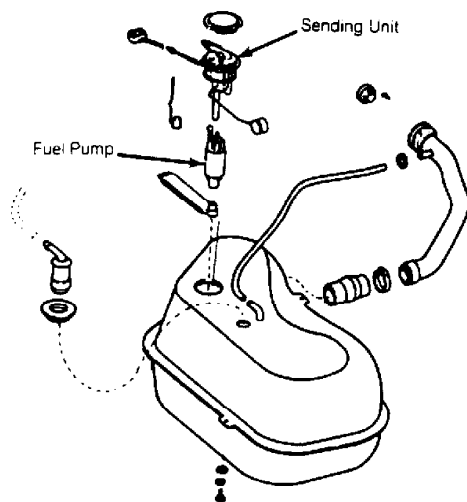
2.5L Fuel Pump & Fuel Gauge Sending Unit
